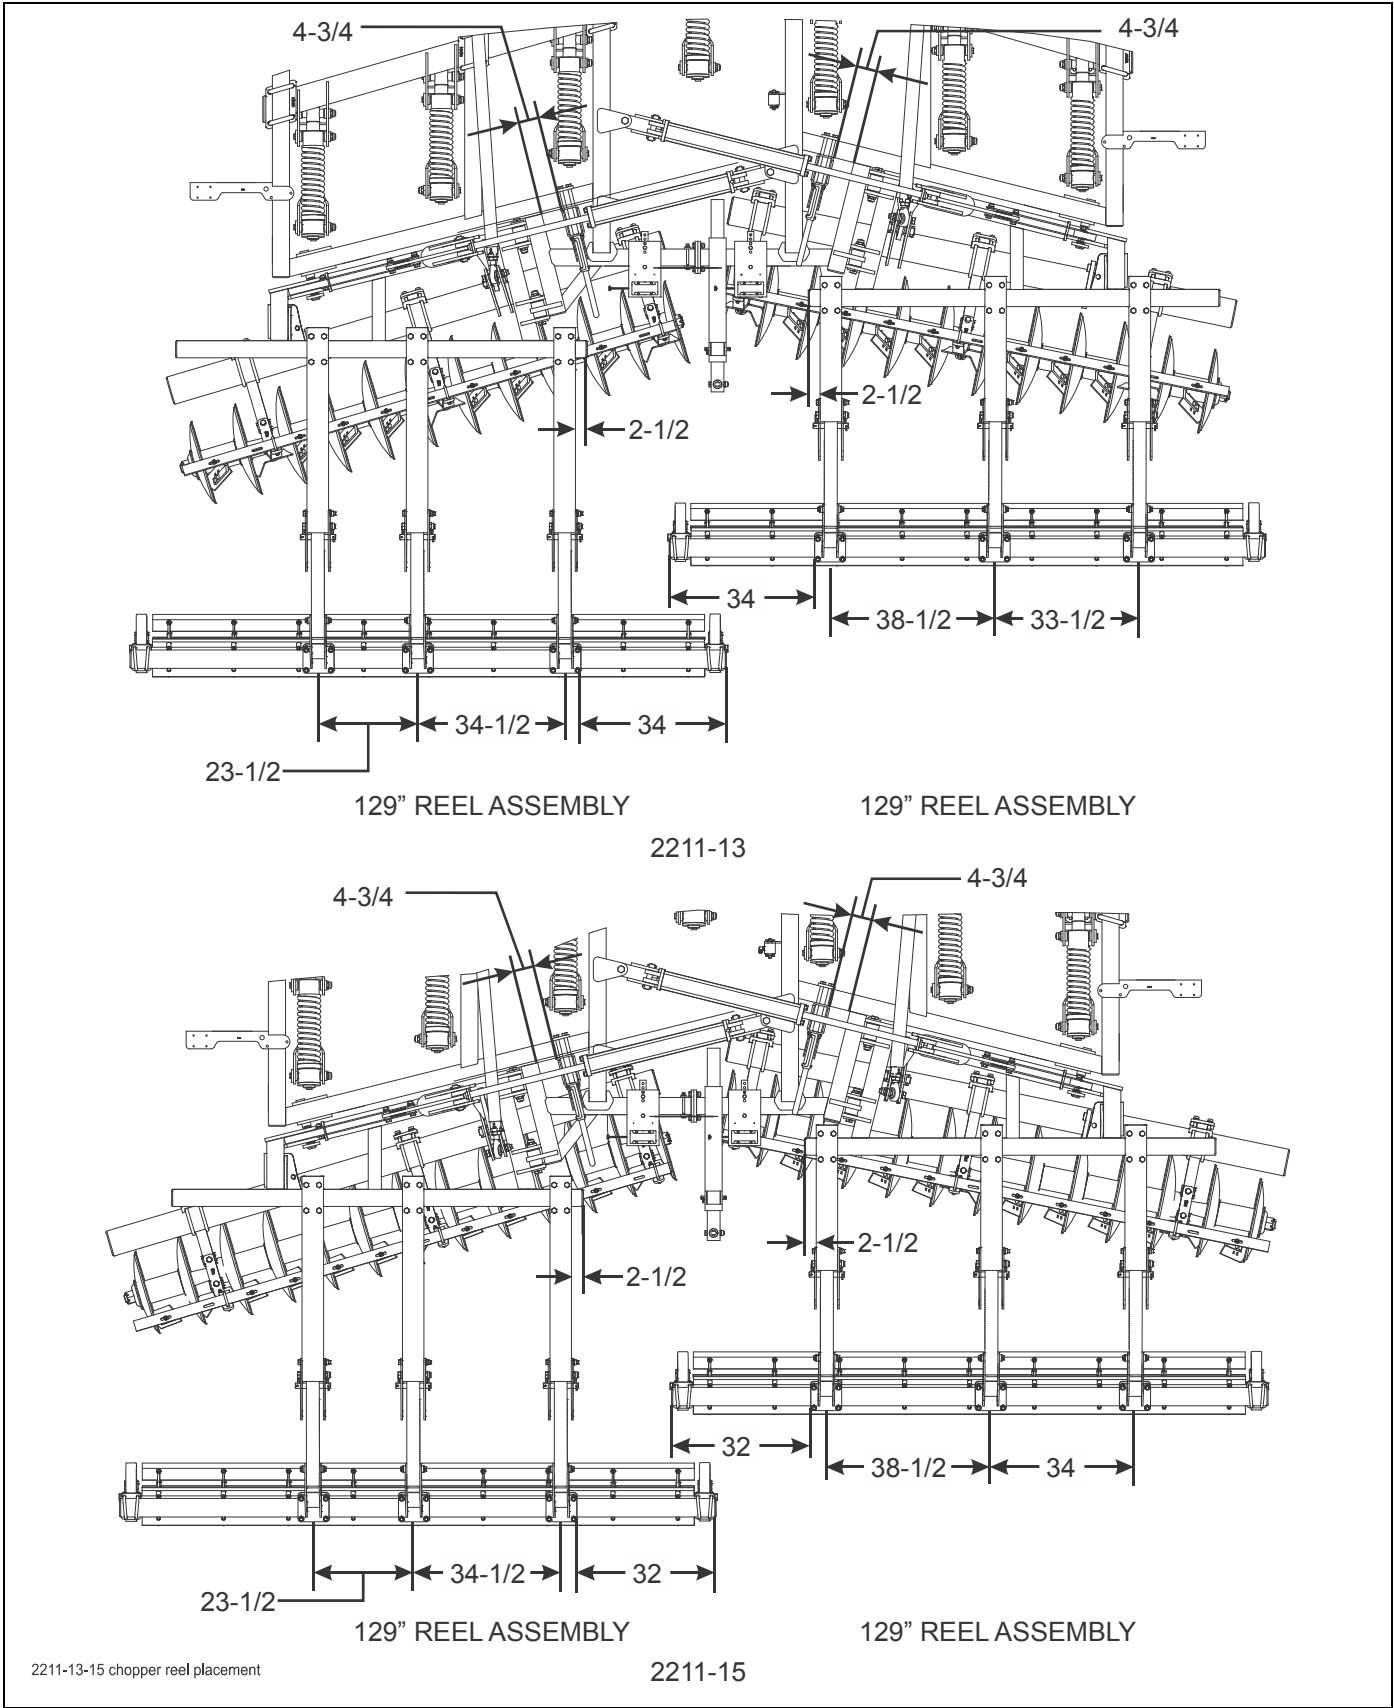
Standard and Hydraulic Tubular Mount Chopper Reel Placement (2211-13 & 2211-15)
